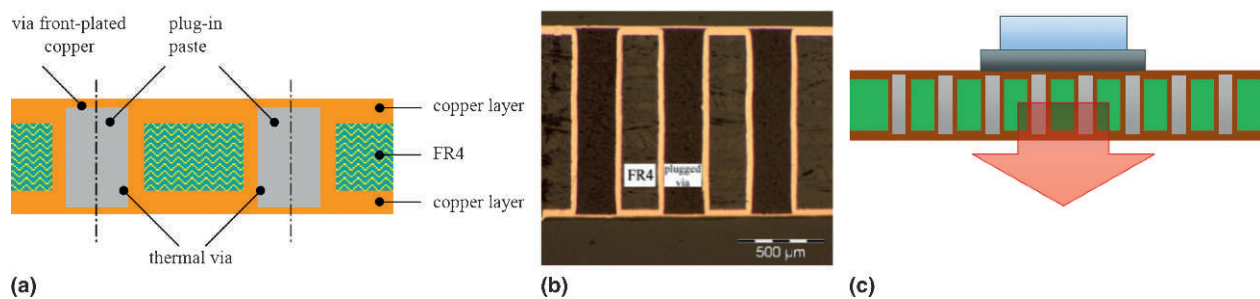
PCB with plugged thermal vias: (a) schematic; (b) cross section; and (c) thermal path.
